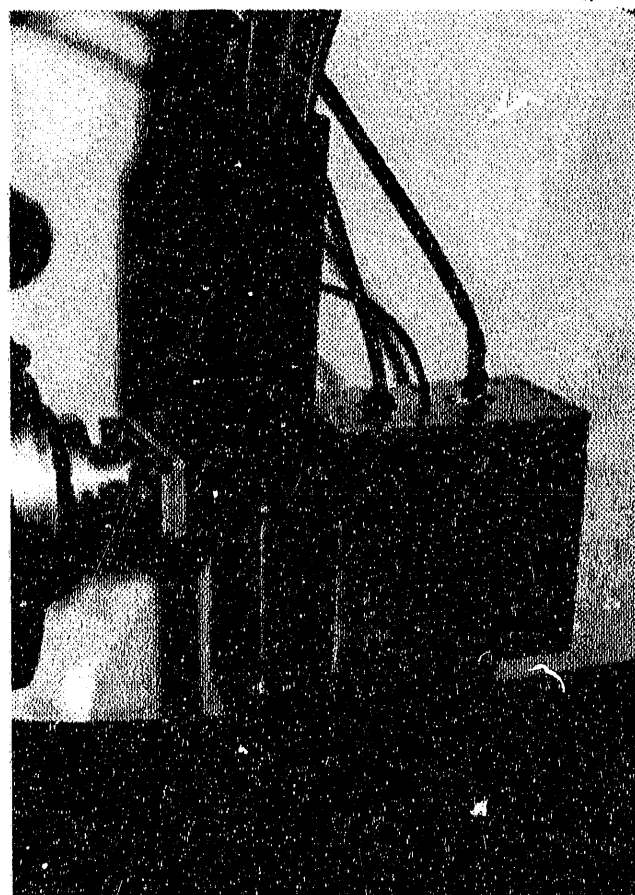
Integrated optical sensor mounted to GMAW torch.
